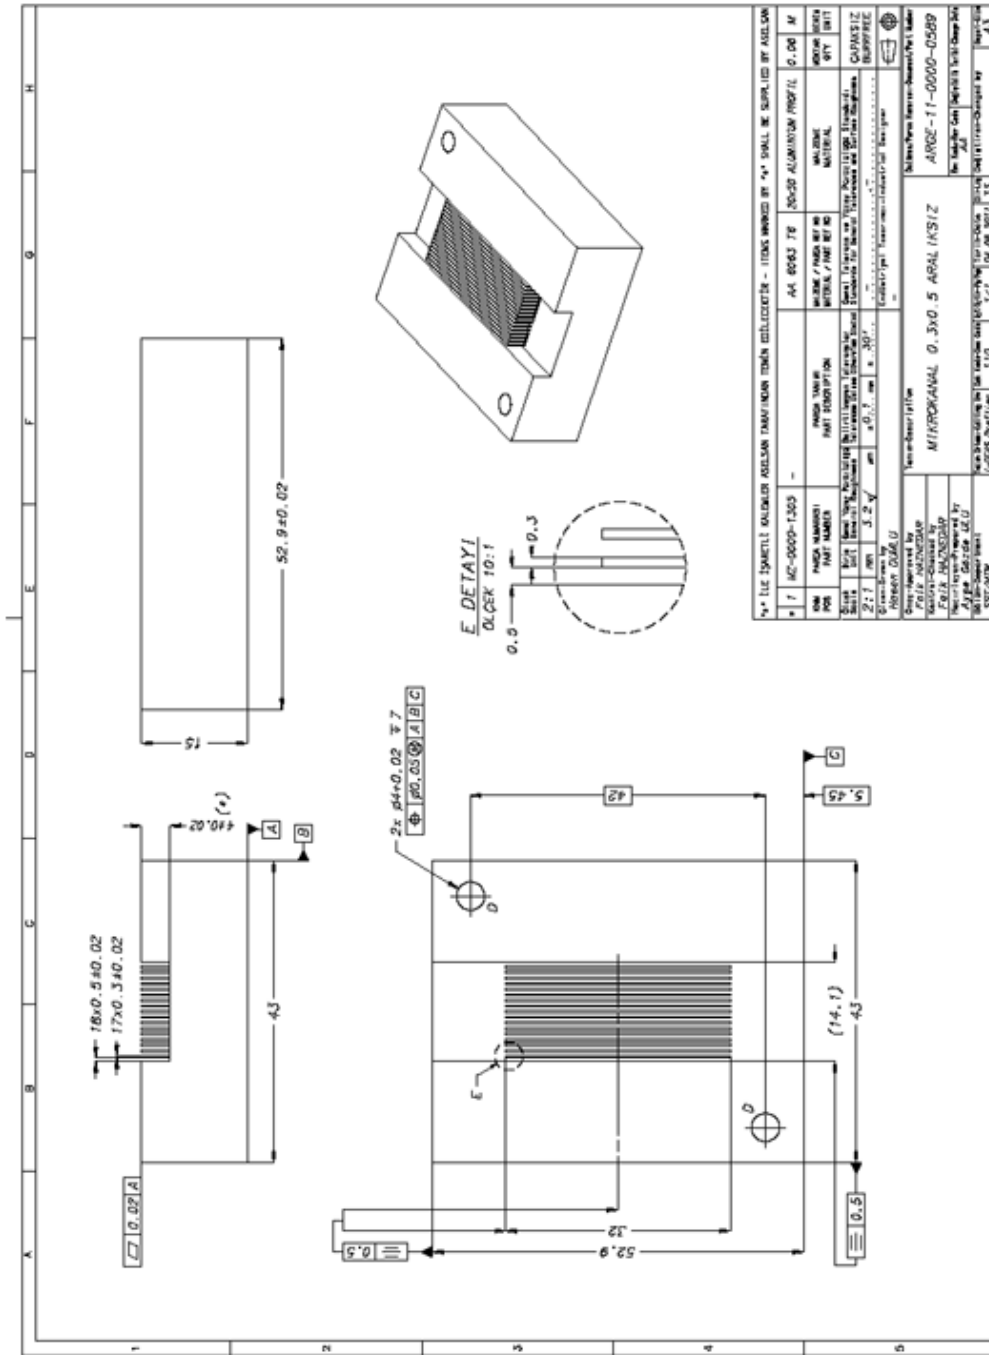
Technical drawings of 500 micron wide uninterrupted channel
